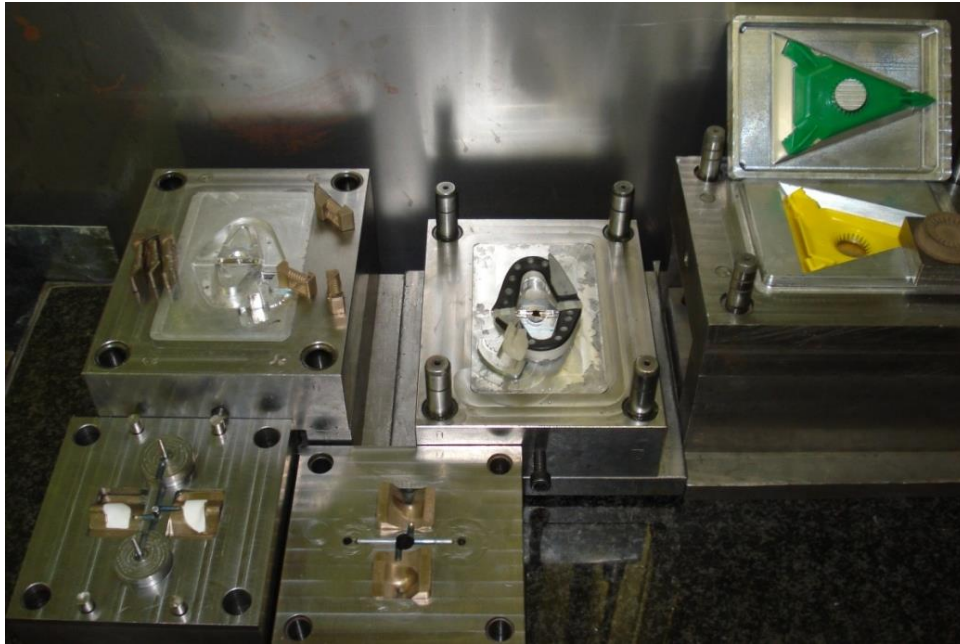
Injection moulds manufactured using hybrid tooling techniques.
